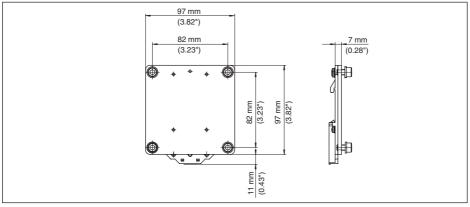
Adapter plate for carrier rail mounting of VEGADIS 82
